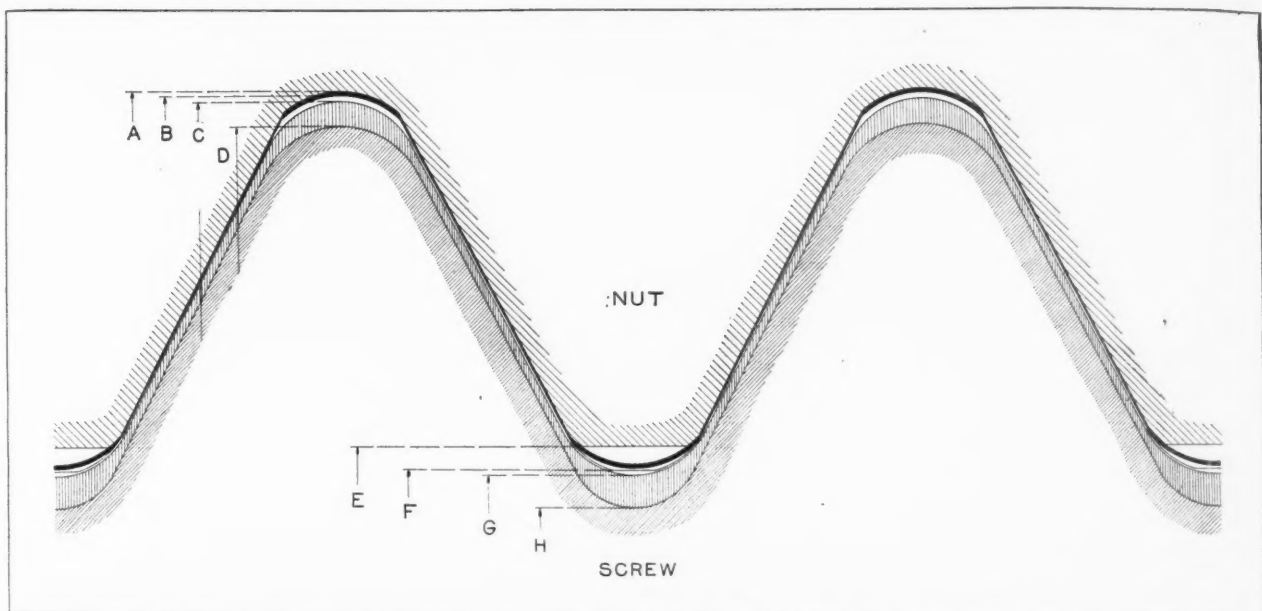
Clearance and Tolerances on Whitworth Standard Tap, Nut, and Screw Threads
